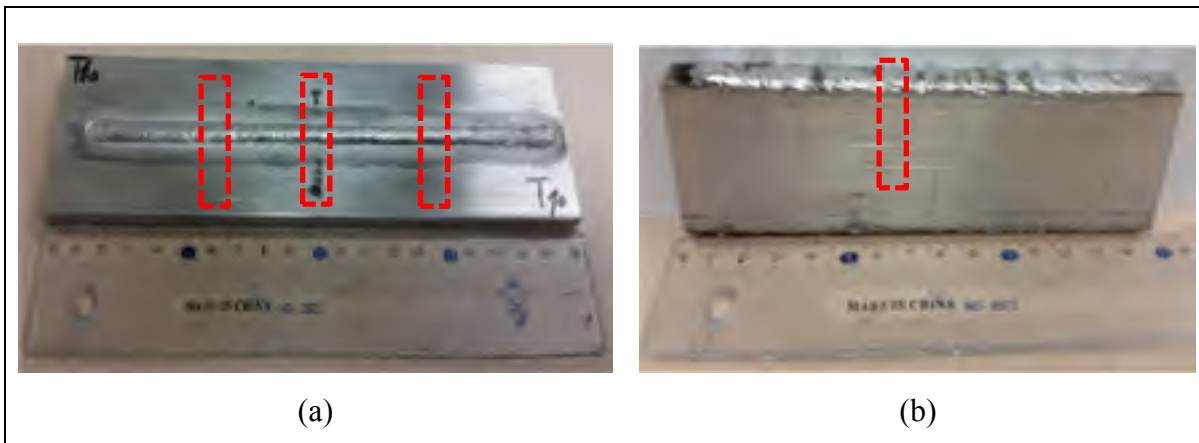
Extracted specimen from the a) horizontal welded plate, b) vertical welded plate
